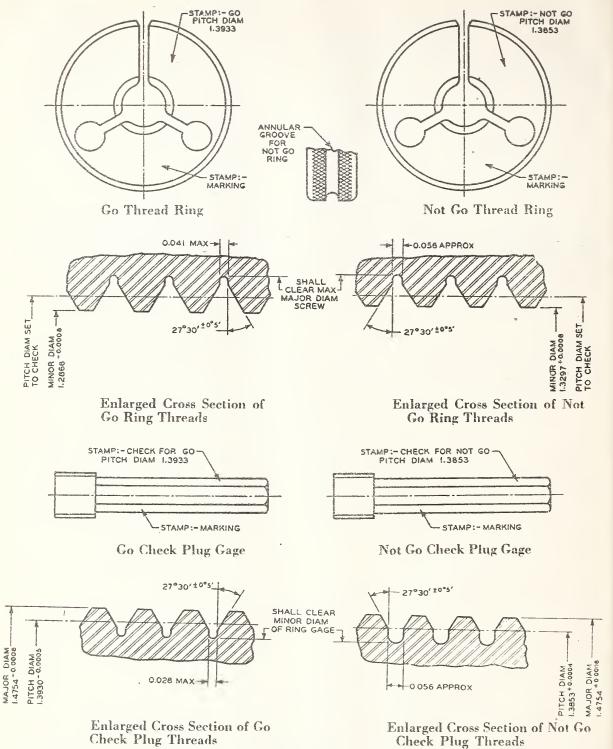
Gage data for "go" and "not go" thread ring gages and their checks for screw threads of Truncated Whitworth form; nominal diameter 1½ inches; 6 threads per inch; class 2 tolerance.
